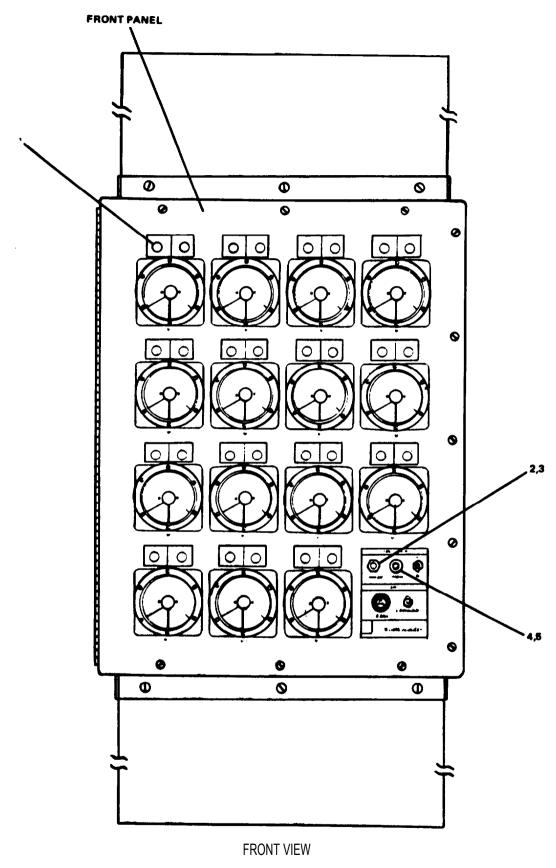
Receiver Module. RE-39260-12/M1-M8-38100/M9-M12- 38139 (Sheet 1 of 2).
